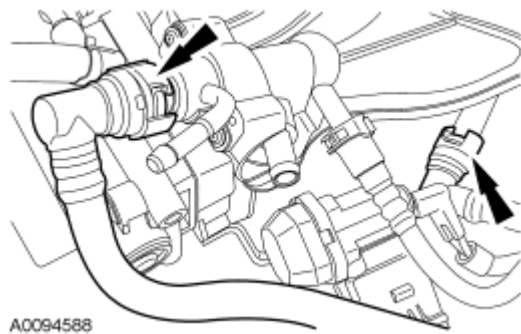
Locating Positive Crankcase Ventilation (PCV) Tube
